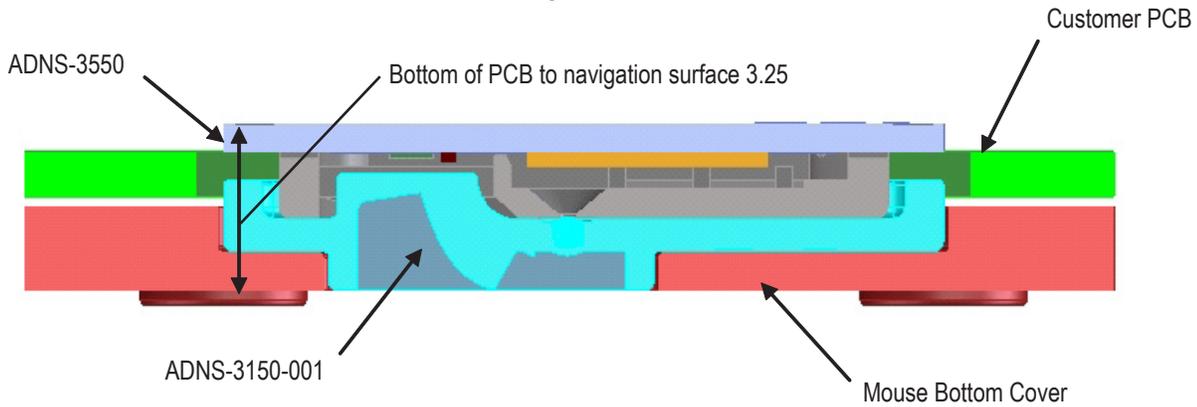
ADNS-3550 assembly cross section view (PCB with cut-out)
